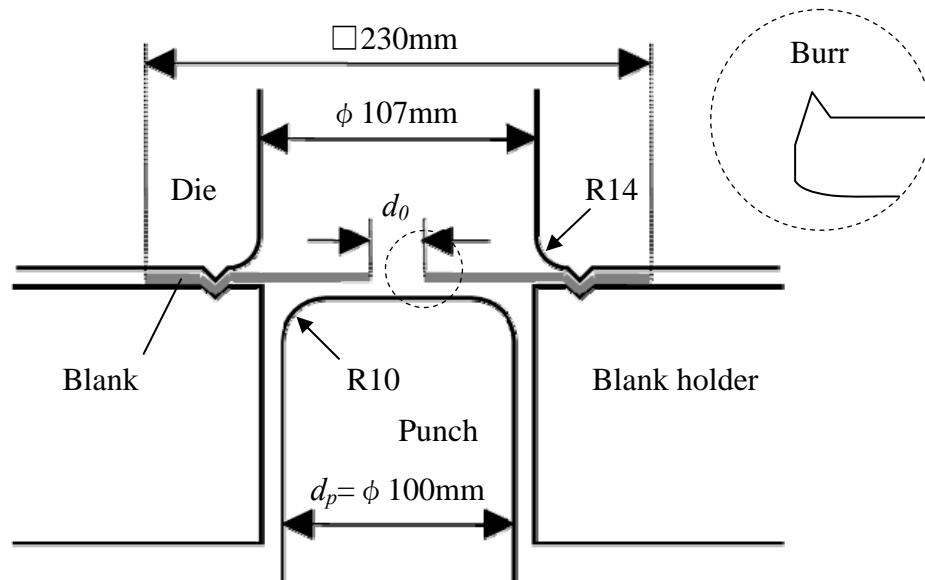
Schematic drawing of geometry for hole expansion test.
